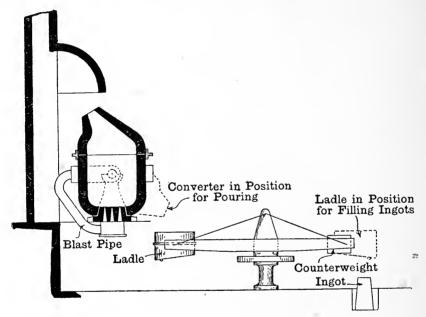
GENERAL ARRANGEMENT OF BESSEMER PLANT.
